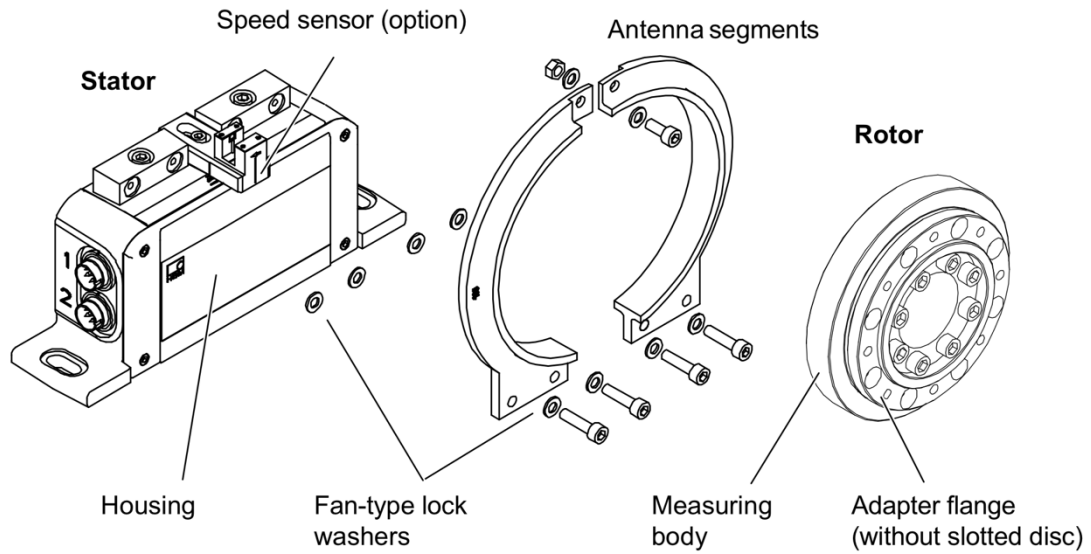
Mechanical build-up of torque sensor T10F (Hottinger Baldwin Messtechnik GmbH, 2018)
